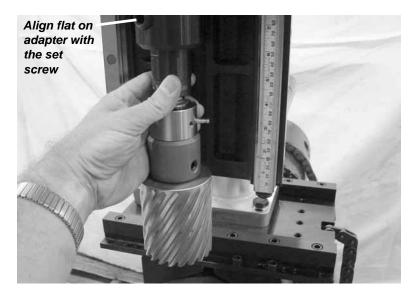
Insert the adapter into the spindle. Align the flat on the adapter with the spindle set screw.
